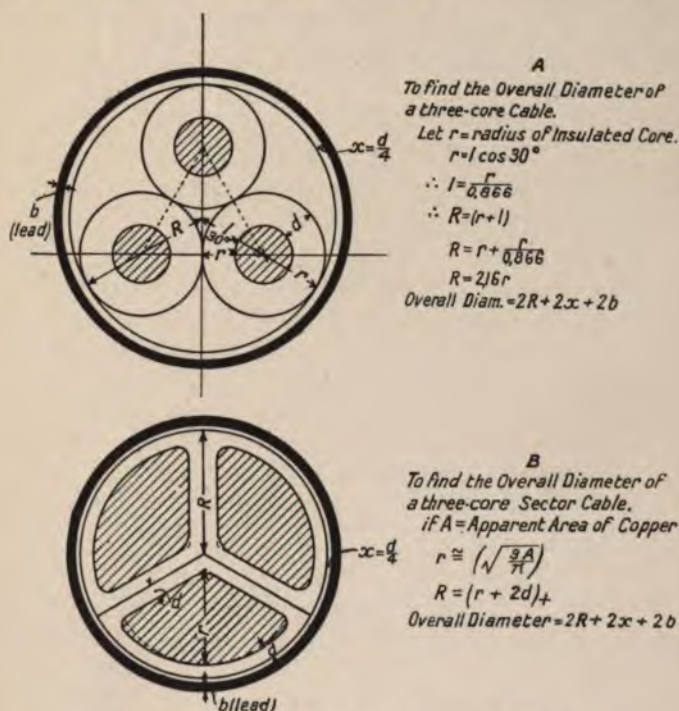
SECTIONS OF HIGH-TENSION CABLES.
